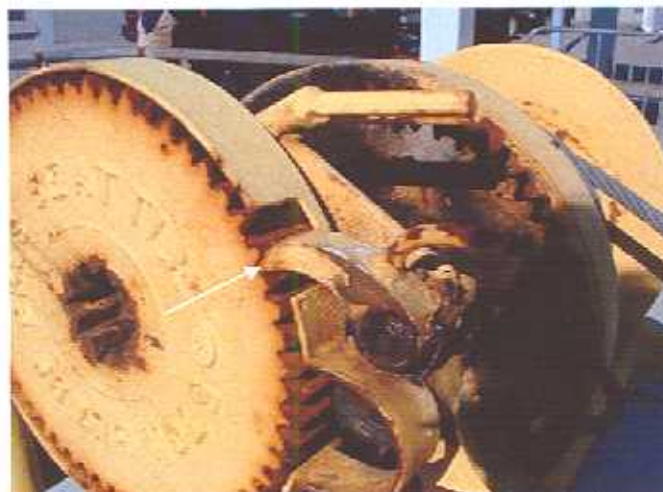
Close view of pawl engaged against a gear tooth. Arrow points to the gear tooth engaged by the pawl.
